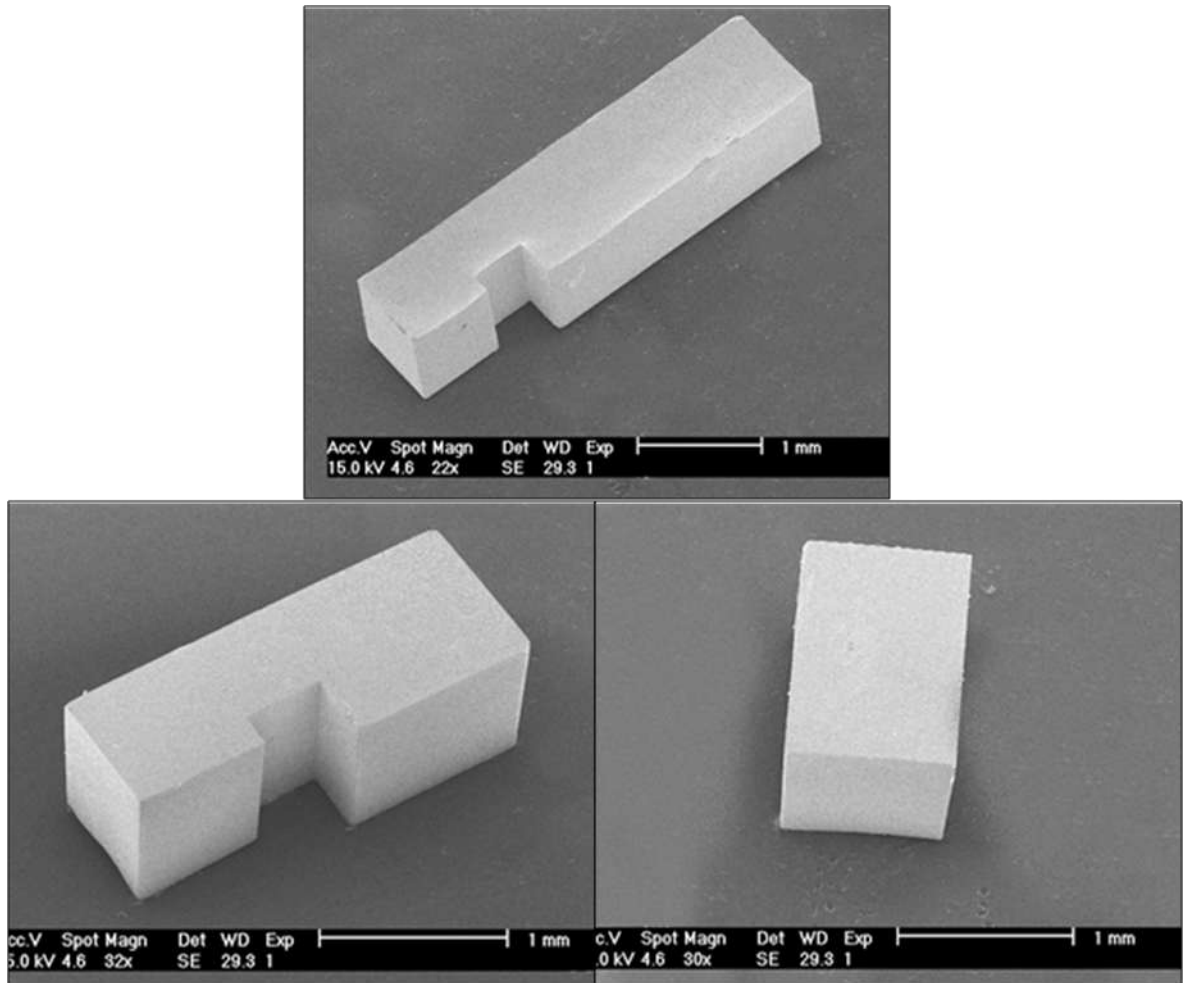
SEM images showing the stainless steel green micro piston fabricated by using pressure less filling method and defected due to insufficient degassing.
